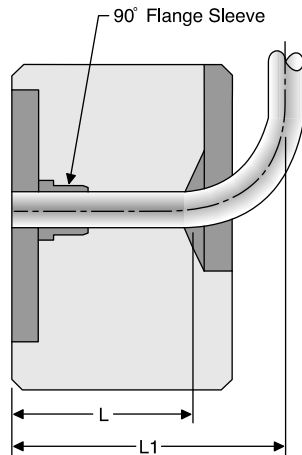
Minimum straight length to start of bend for 90° flanging
